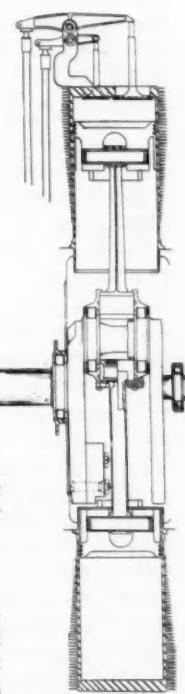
LATERAL SECTION AND ELEVATION PARTLY IN SECTION OF NINE-CYLINDER ENGINE OF BRITISH MANUFACTURE WITH SOME DETAILS OMITTED
